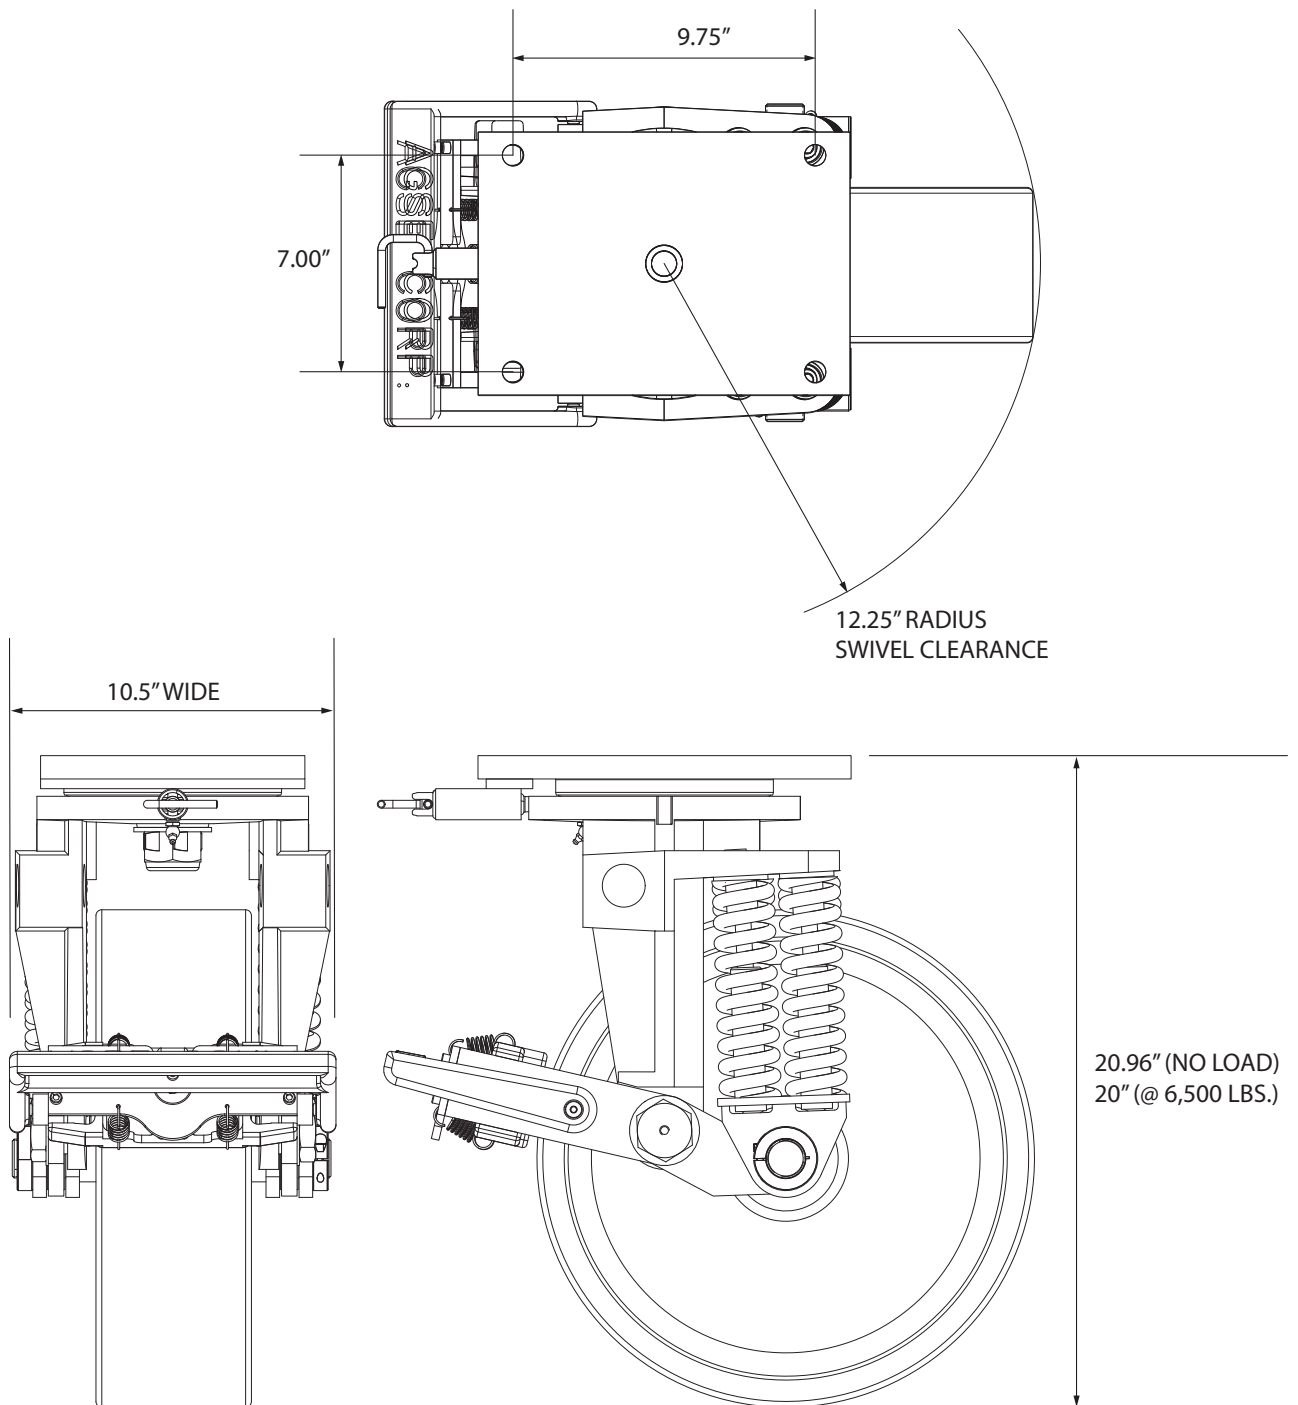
Dimensions and Clearances for AM-2079-7 (6,500 LBS -16" Diameter)
